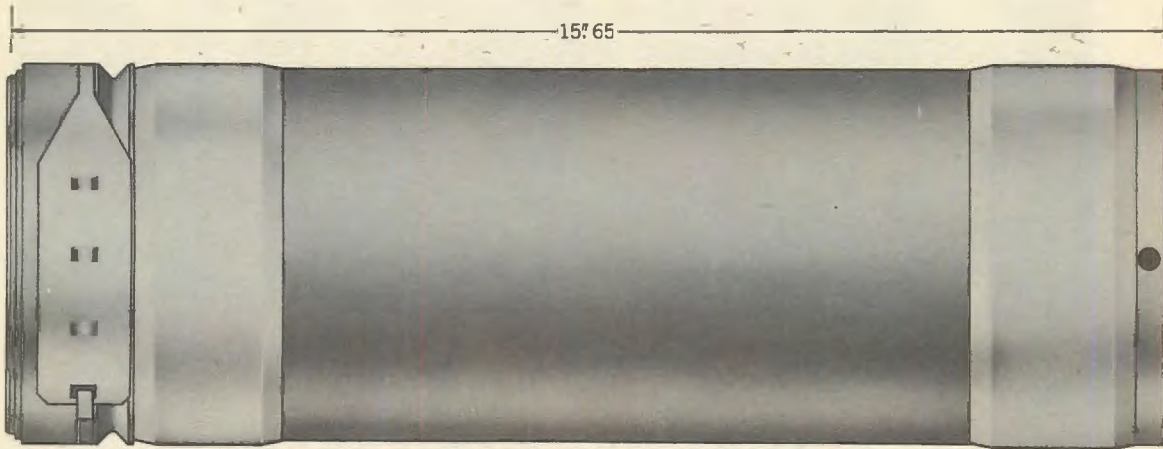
5.0-Inch Rocket Motor Mk 4 Mod 4, External View.
